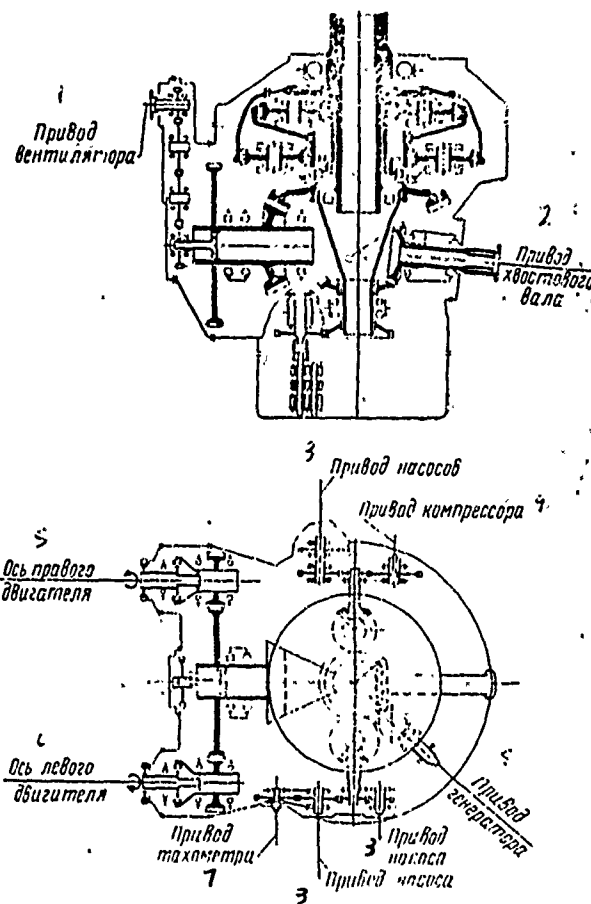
Kinematic Diagram of the Main Reduction Gear:
